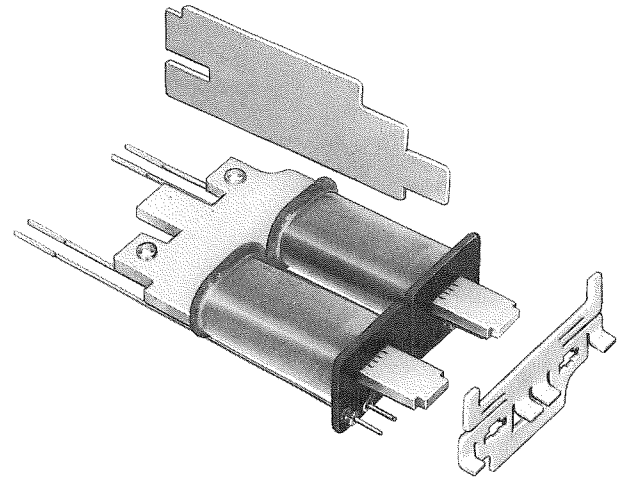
AK Relay Coil Assembly and Core Plate
